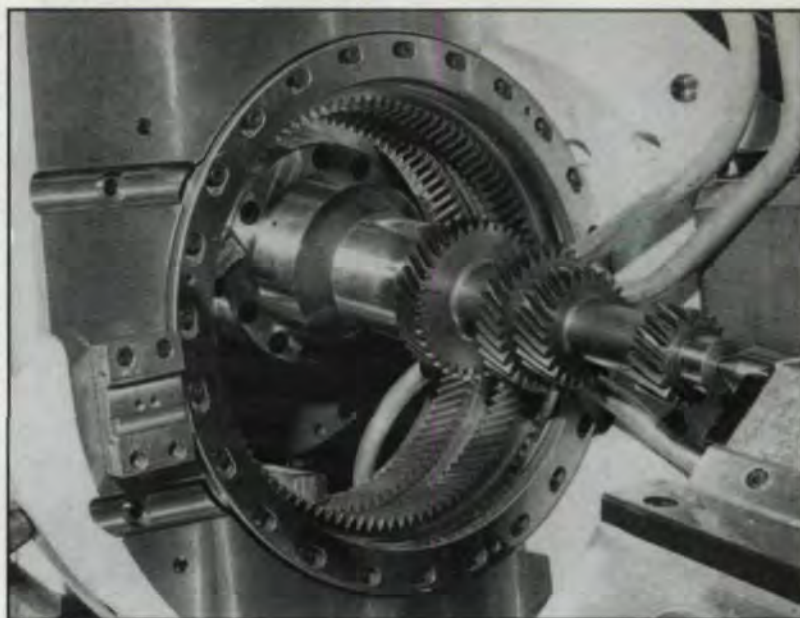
In Coroning, cutting takes place when the crossed axes of the tool and the workpiece roll with each other.
